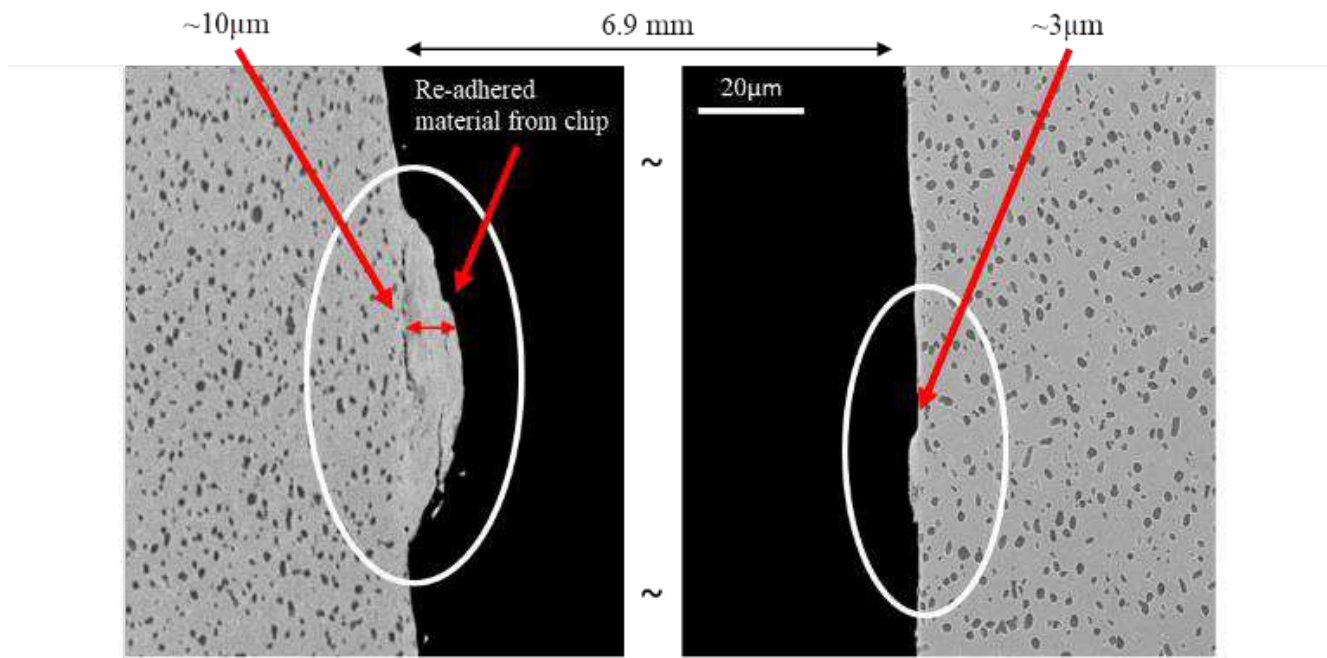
SEM Electron Backscatter micrographs of the machined surface on either side of a 6.9mm hole drilled using a coated tool at  $v_f$  275 and  $v_c$  46.4.
